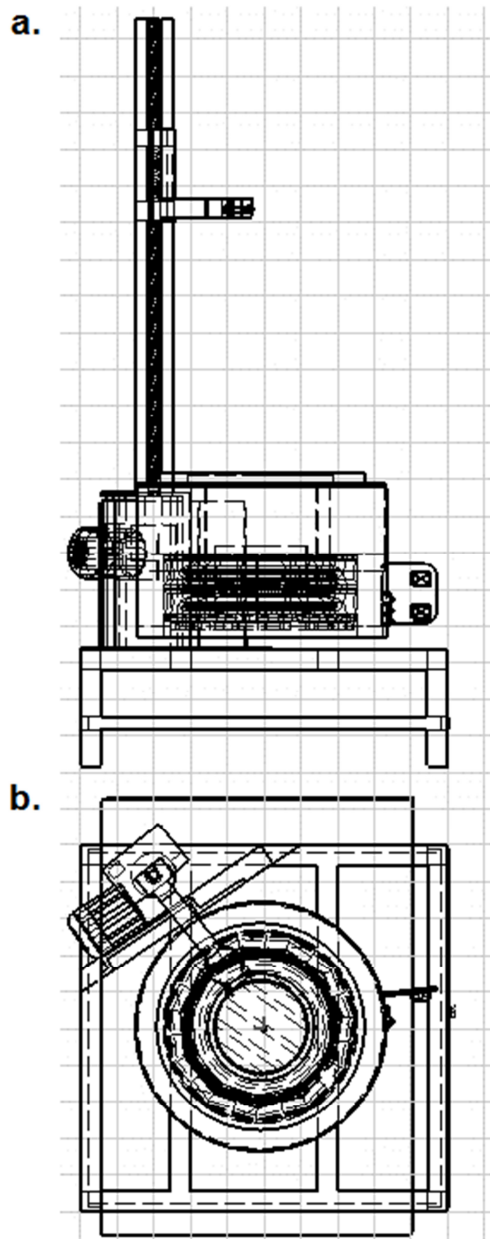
a) Side and b) top view drawings of the system manufactured.
